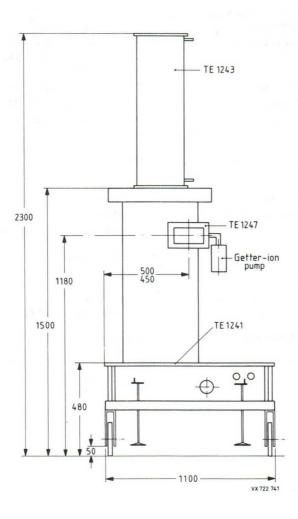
Complete assembly consisting of tube, trolley, oil tank, focus mount, r.f. transition and operational lead shieldings.
